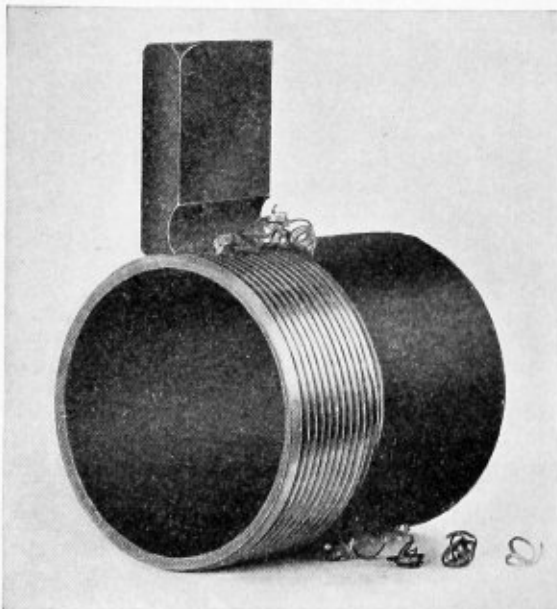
THREAD CUT WITH PROPERLY MADE DIE.
